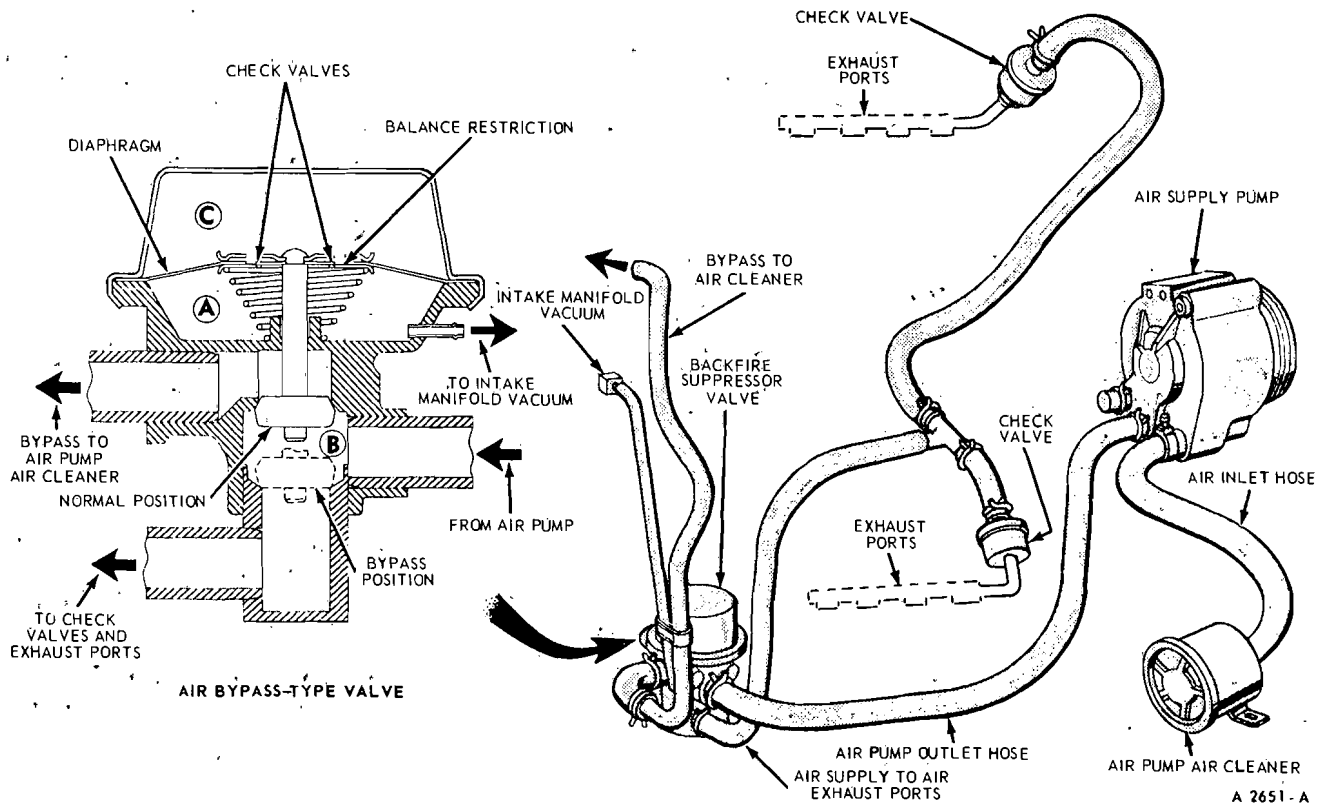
Thermactor Exhaust Emission Control System With Air Bypass - Type Valve
